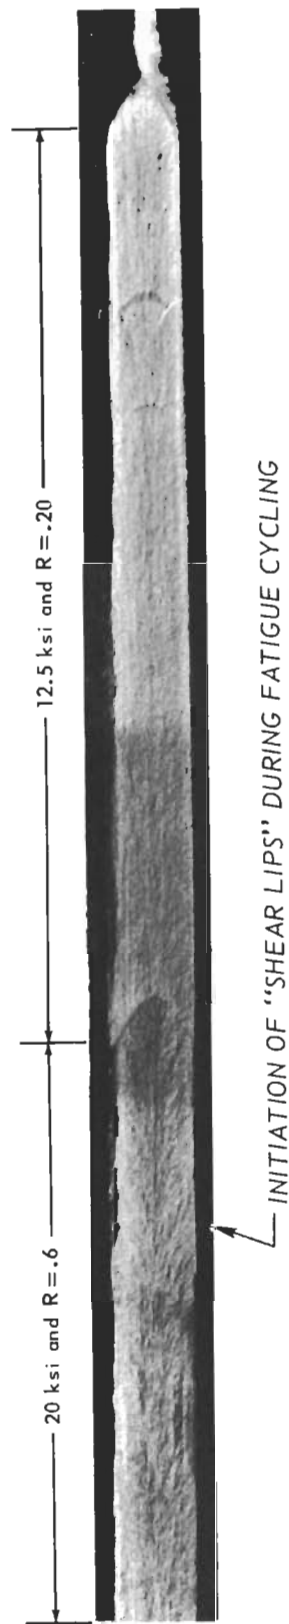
MACROPHOTOGRAPH OF SPECIMEN DA 66 SHOWING FRACTURE MODE TRANSITION
